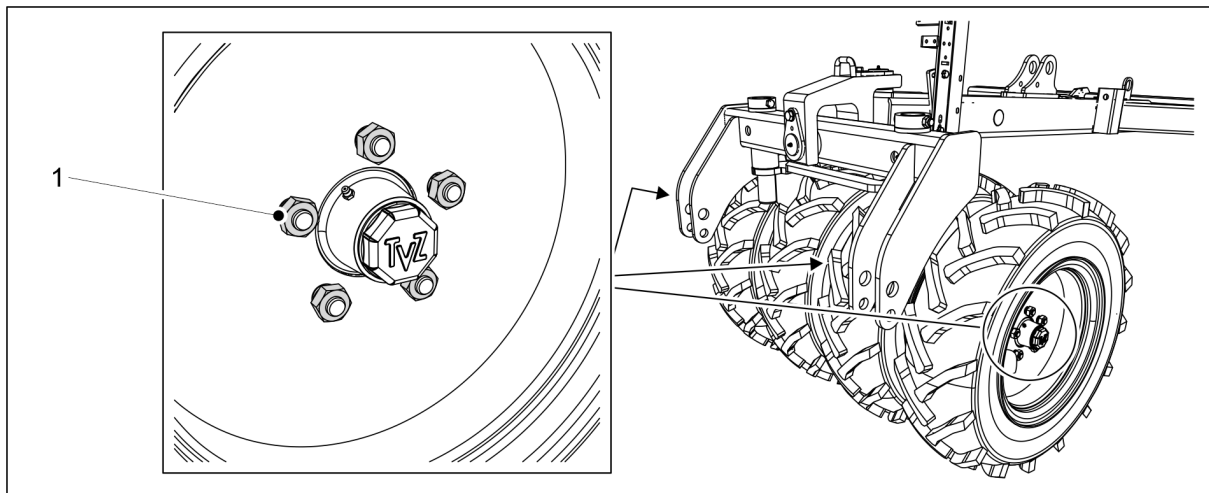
215. Wheel bolts of the wheel packer
